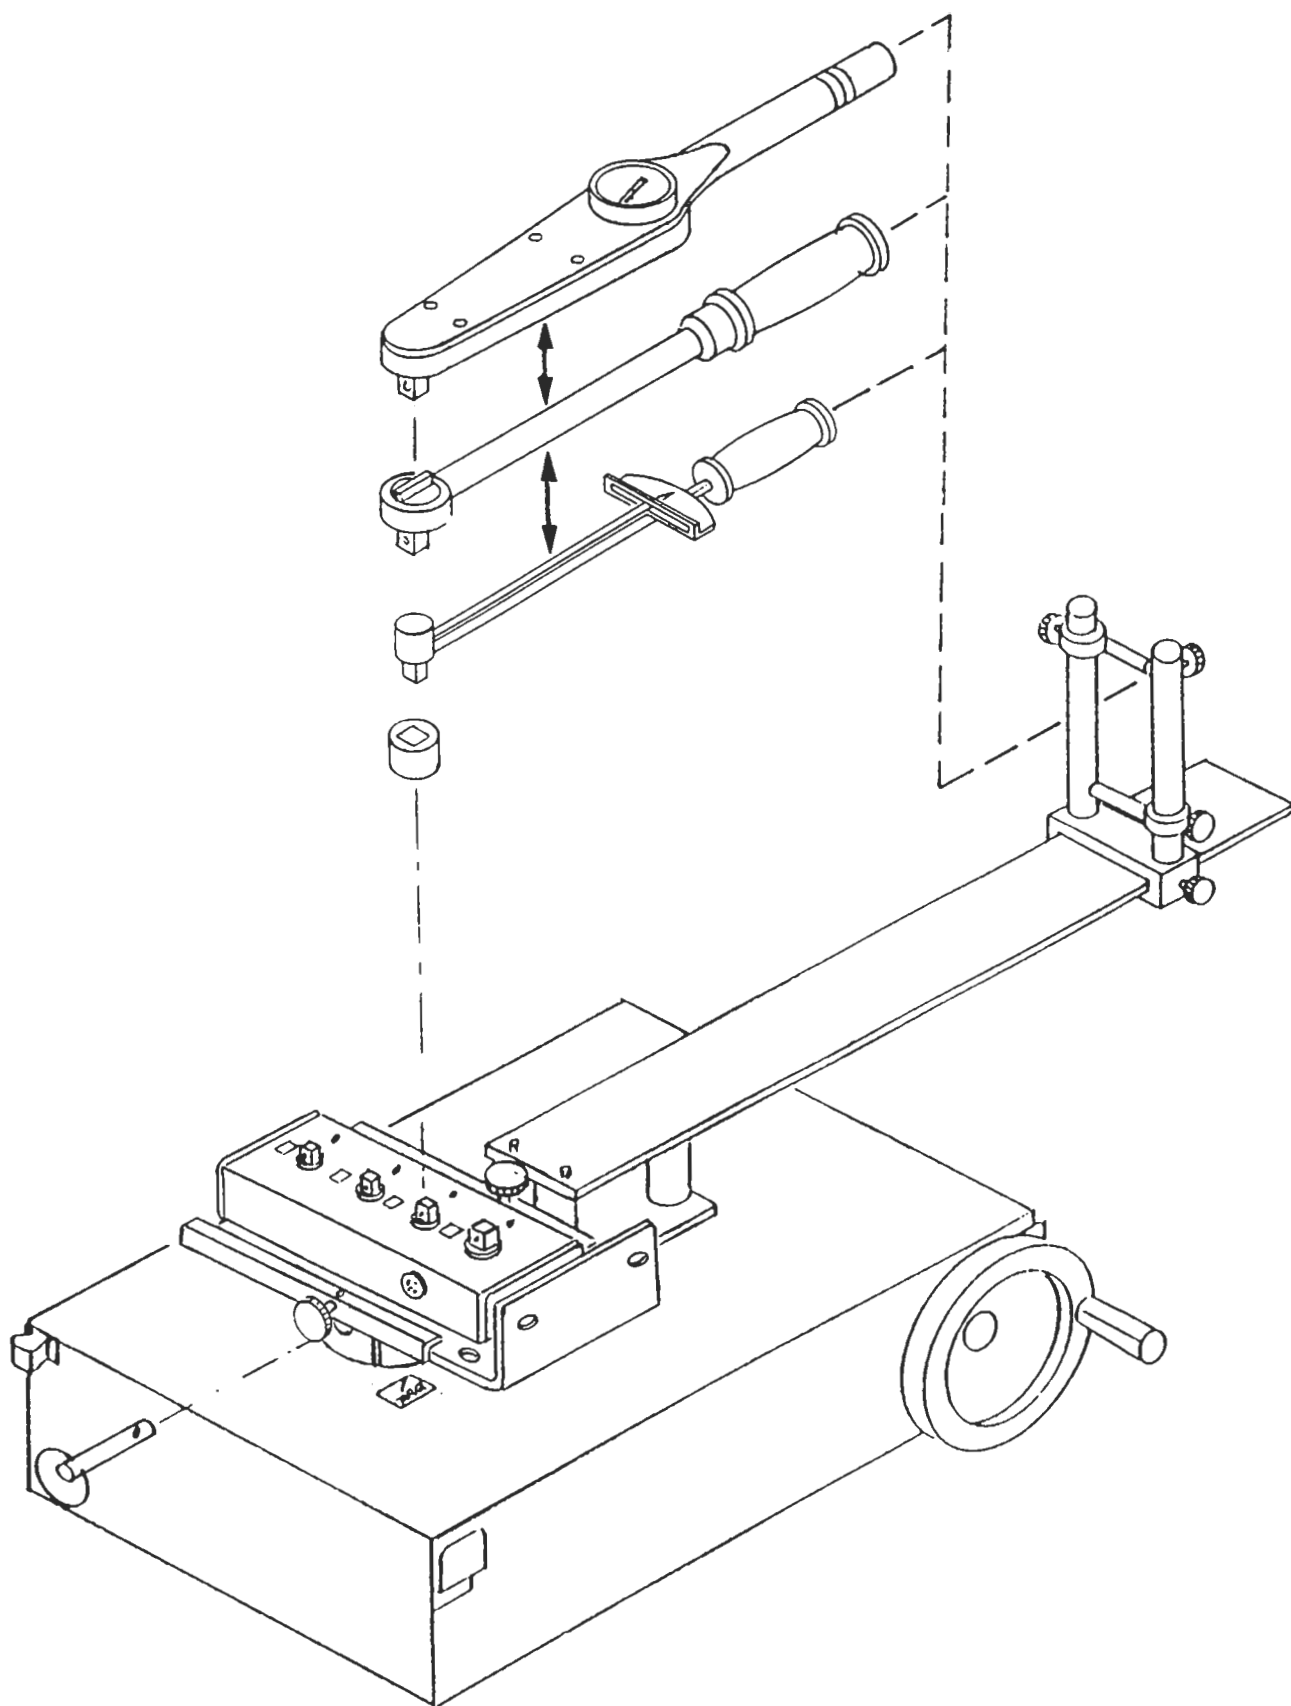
Low Torque Station Test Setup (Sheet 1)
